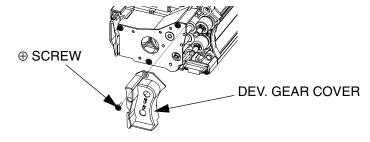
Removal of the Idler Gear (Z20-L) Assembly
